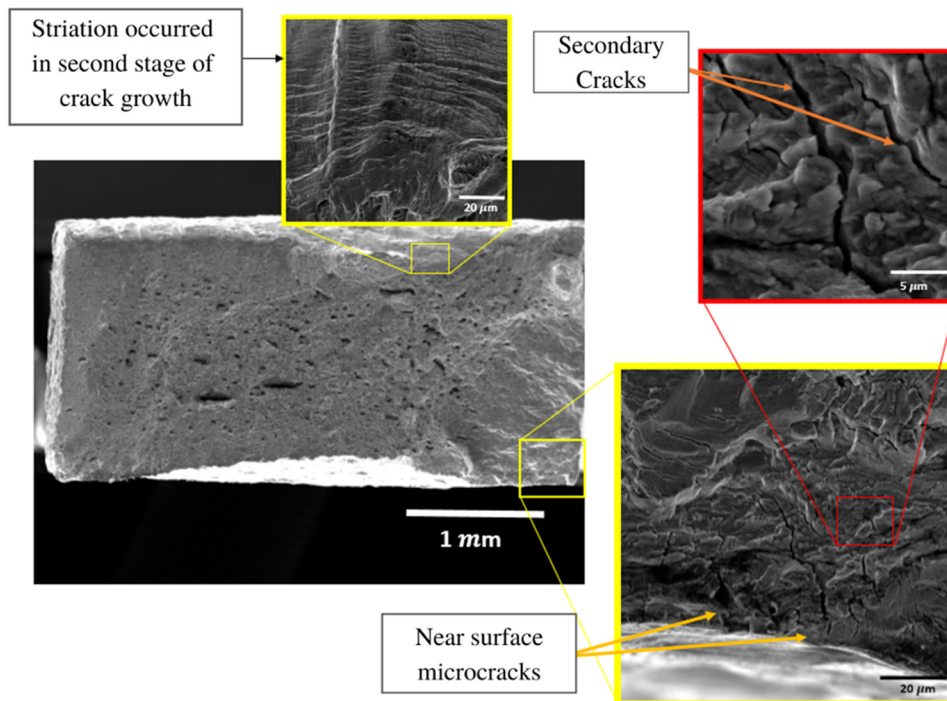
Typical fatigue fracture surface of the HRA sample.
